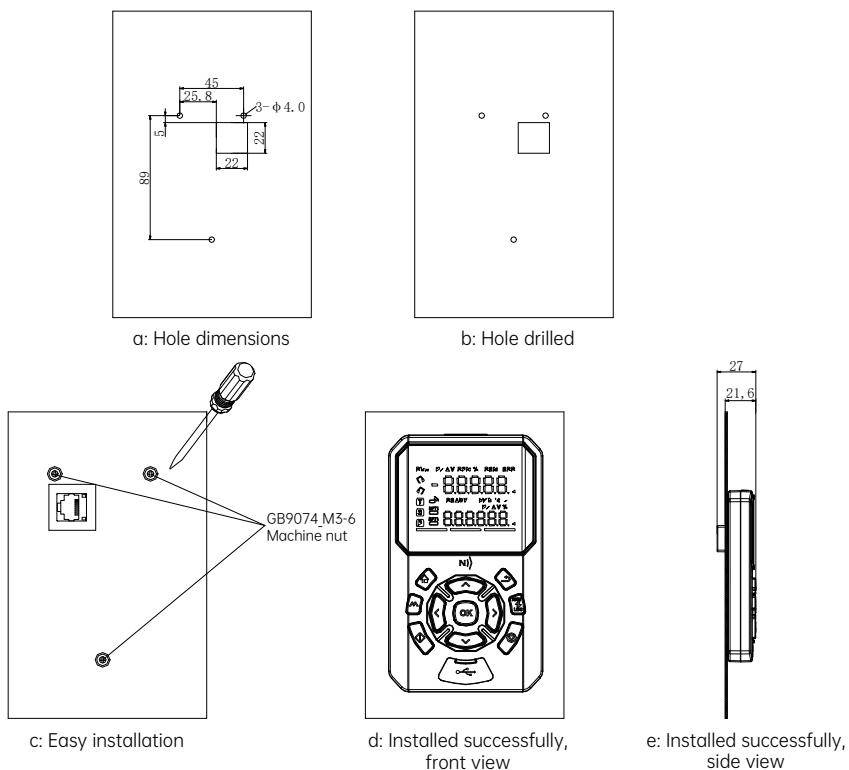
Easy installation of remote large LED keypad/operating panel
